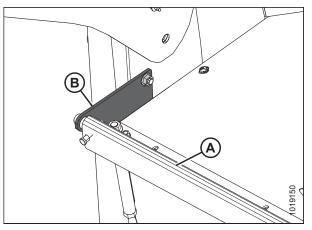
Forming Shield – For use with R85 Rotary Disc Header
